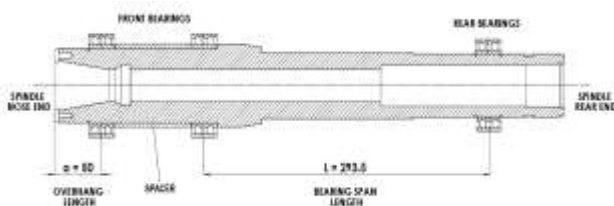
Bearing Arrangement 1 with Span Length 293.5 mm.
